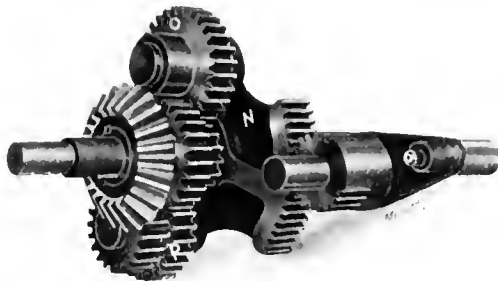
Detail of the Tumbler Gear, seen in Fig. 2, which Doubles the Number of Speeds.
